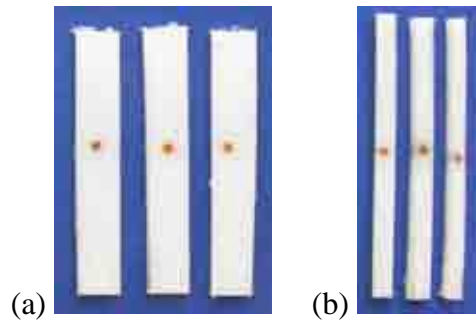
Samples cut using (a) guided band saw, (b) blade cutter using water cooling. Note: as the chips inside the samples were not visible in the picture, their approximate positions were marked on the sample surface.
